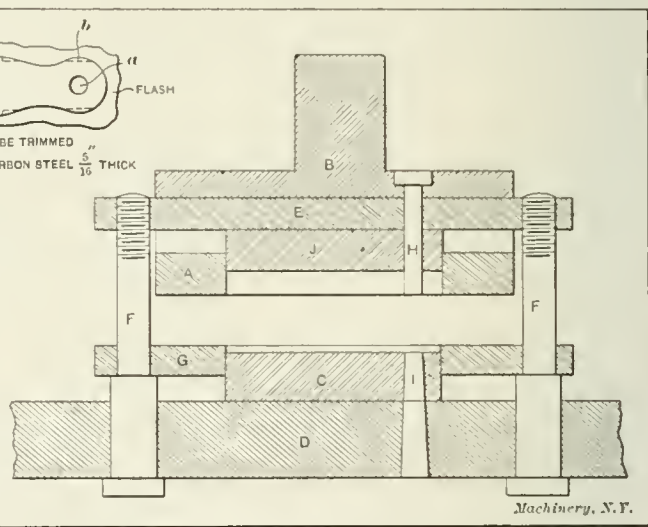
Sectional View showing Method of Applying Stripper-plates to the Punch and Die
